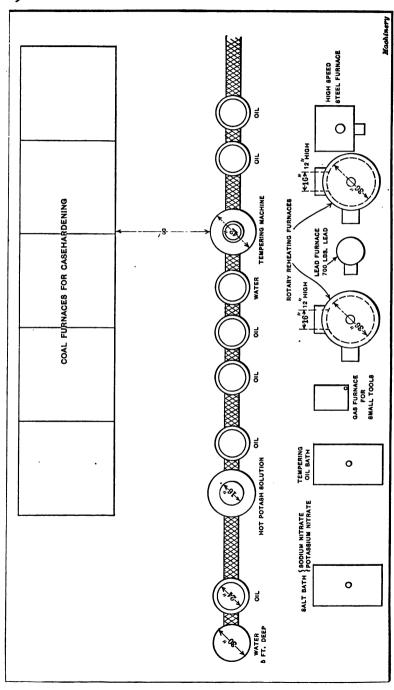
Plan of Gear-hardening Department -- Gleason Works
